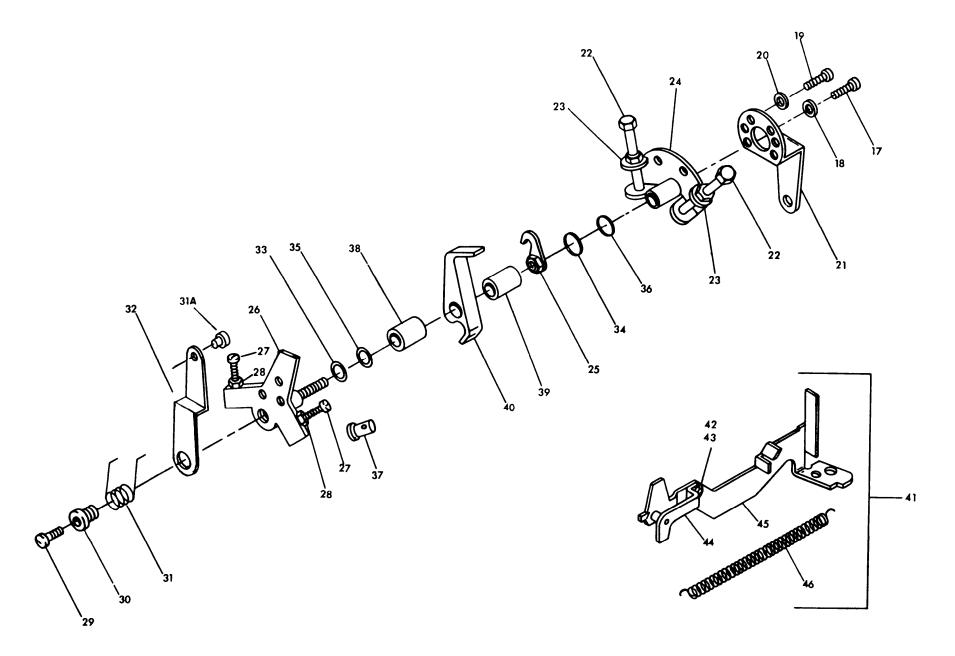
Fuel Injection Pump Assembly (Sheet 2 of 7)
